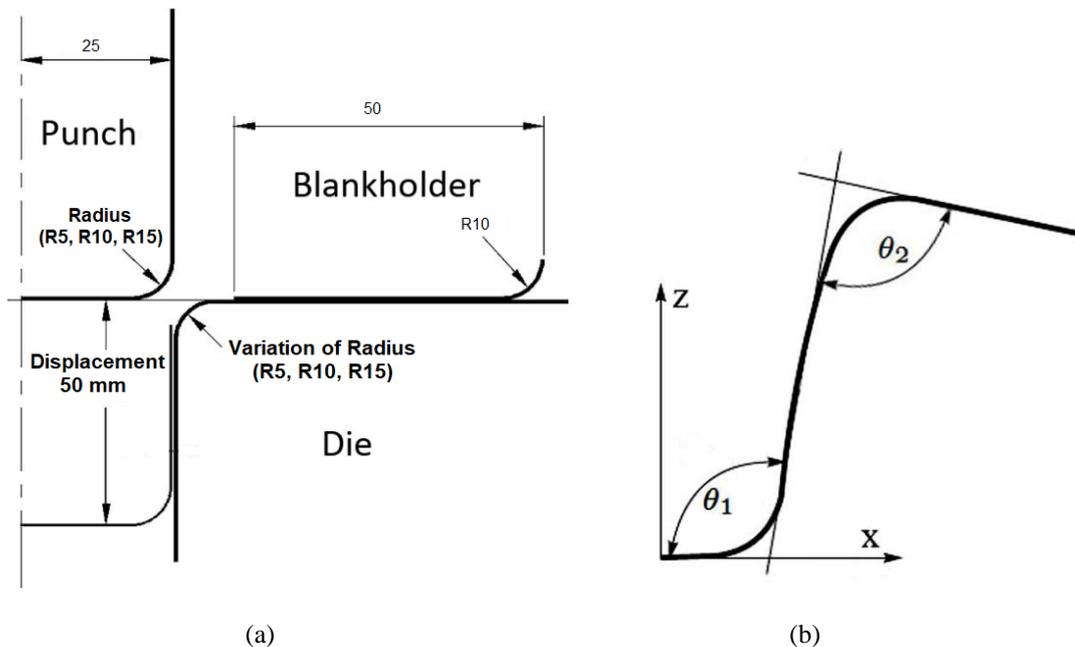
Experimental Model Makinouchi (1993) with depth drawing 50 mm. (a) Tool Design and, (b) Springback Measurements Parameters
